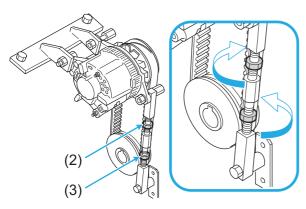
Belt Tension - Adjust (Lock Nut)
